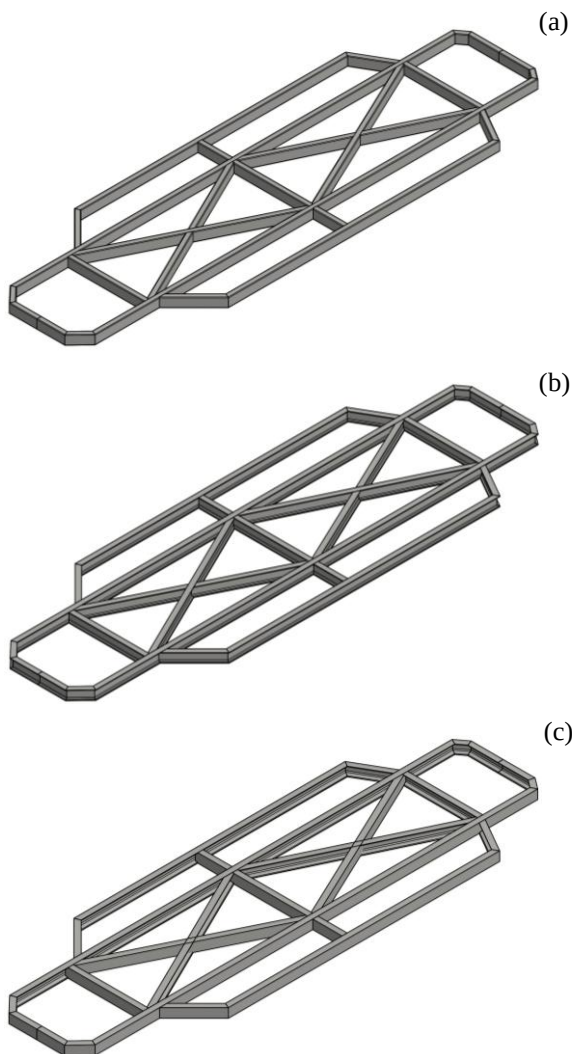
Generated chassis with (a) rectangular; (b) I-beam (S-section); and (c) C-channel section
